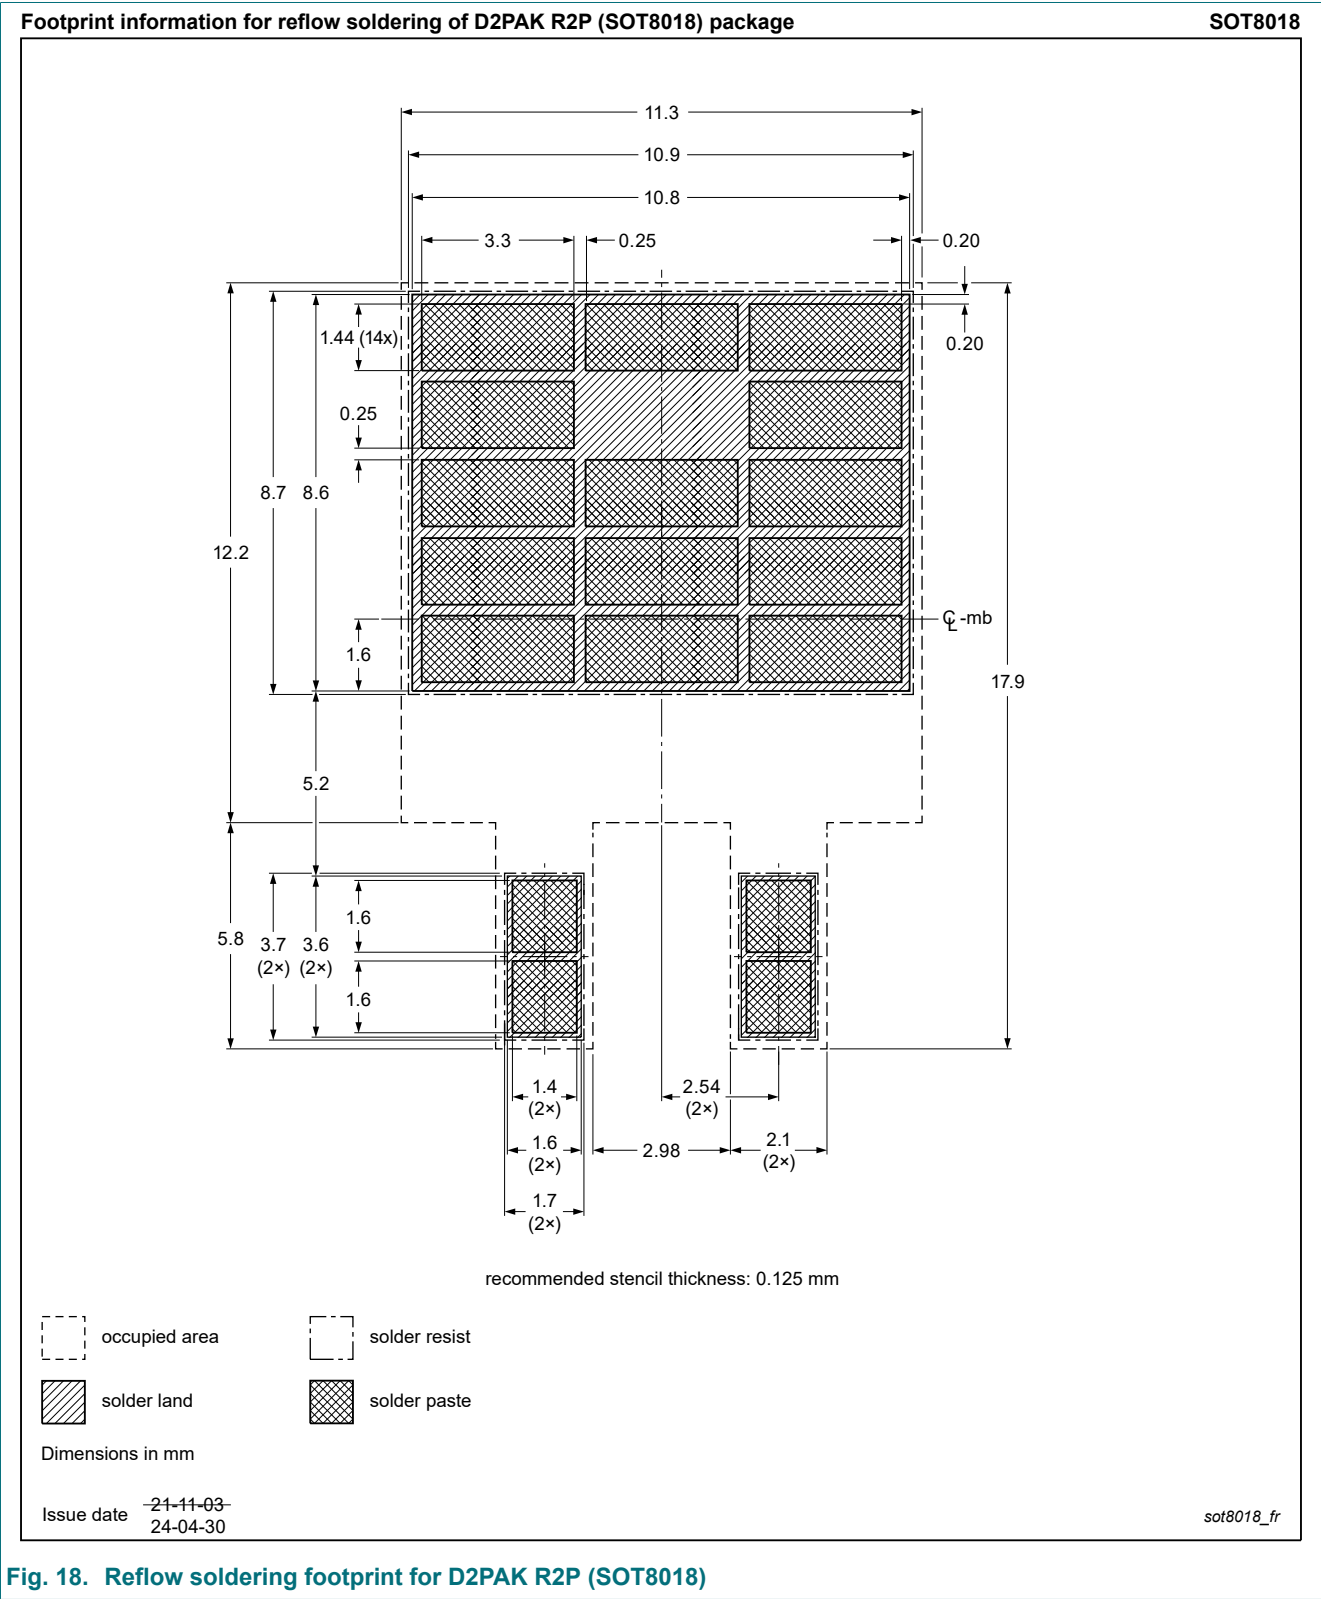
Reflow soldering footprint for D2PAK R2P (SOT8018)
